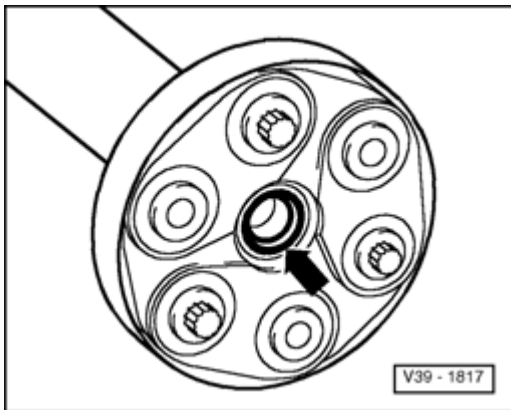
Identifying Sealing Ring In Driveshaft Flange
